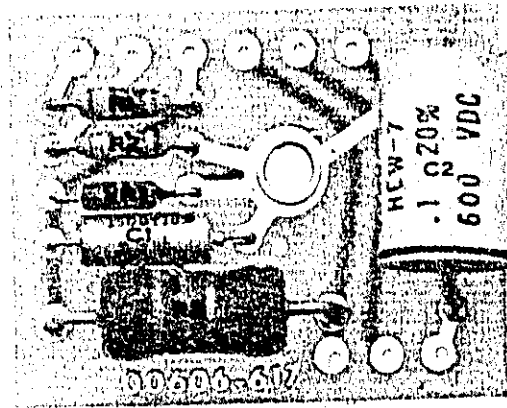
Etched Circuit A6 ΔF Assembly Component Locations
